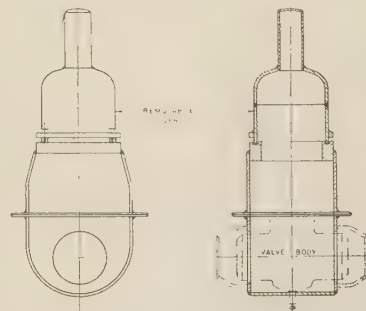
AIRTIGHT ENCLOSED VACUUM VALVE
